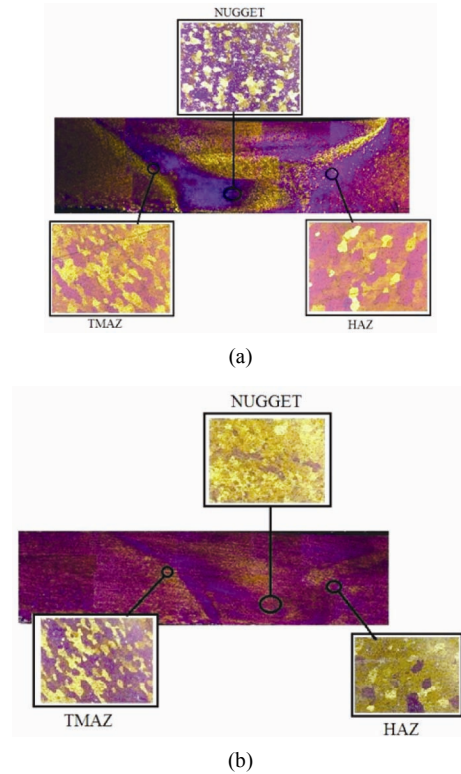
Micrograph details: (a) S2000 f150 threaded tool; (b) S2000 f150 unthreaded tool.
